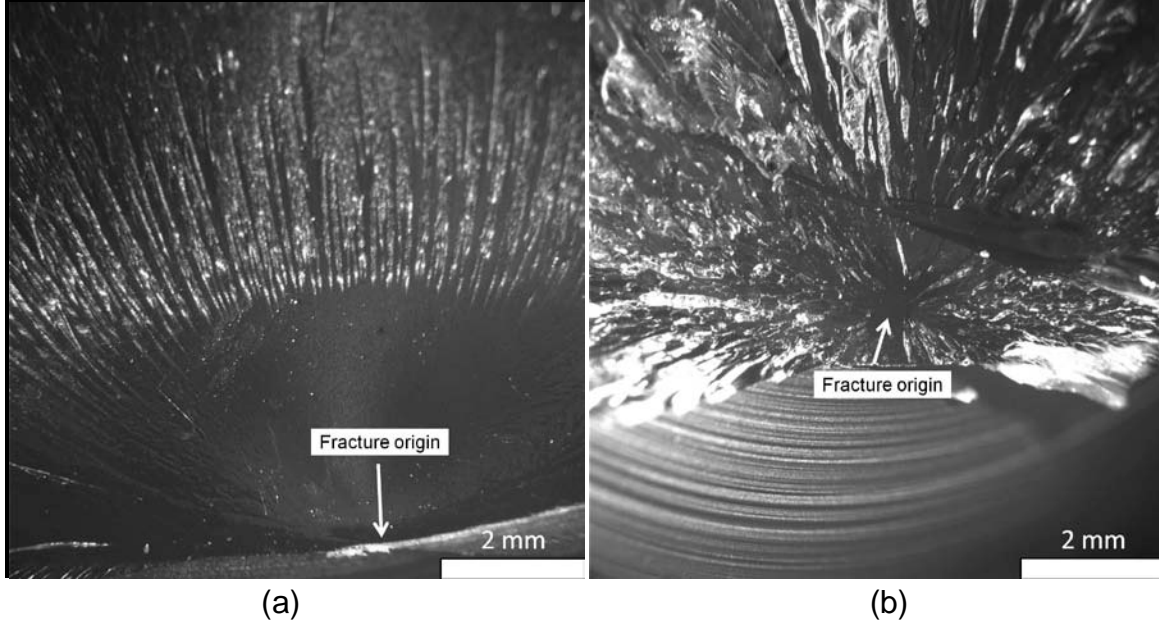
Images showing the fracture surfaces of (a) GB3-8 and (b) GB3-9.
